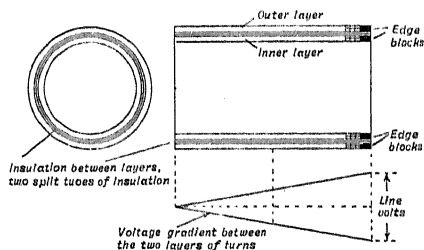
Section of Double-layer Spiral Coil for Core-type Transformer.
